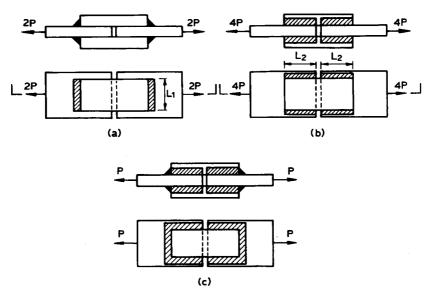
Connections subjected to a shearing force only. (a) Tension fillet welds; (b) shear fillet welds; (c) all-round welds.
